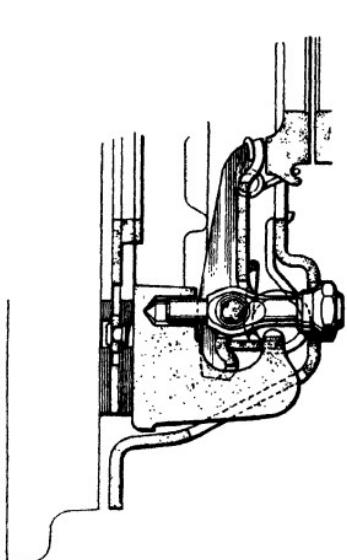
POSITION OF RELEASE LEVER WITH CLUTCH ENGINAGED.
